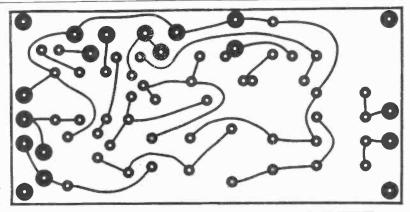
Actual-size foil pattern can be used to make your own circuit board.
